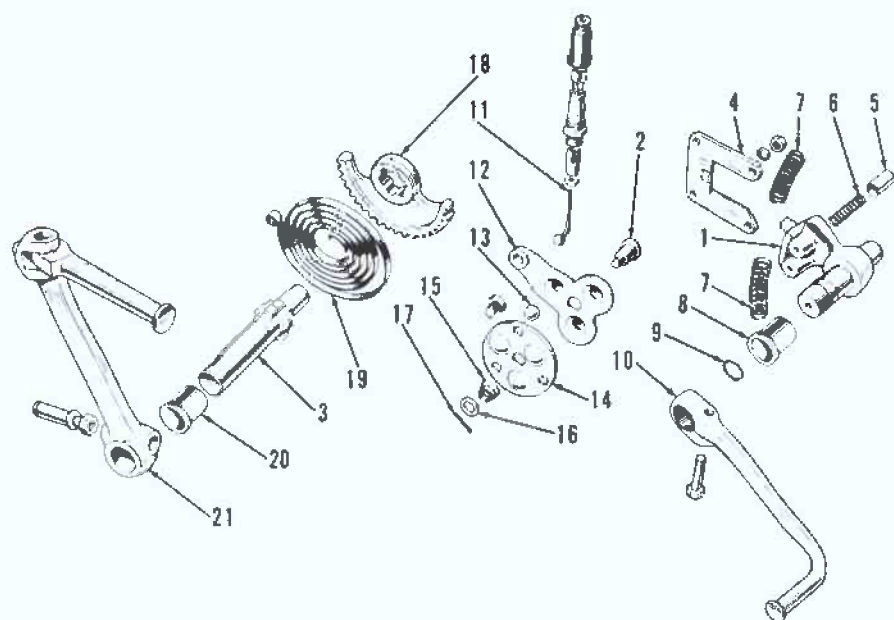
Exploded view of parts located in the gear box outer cover. Refer to Fig. TM4-29 for assembled view.
